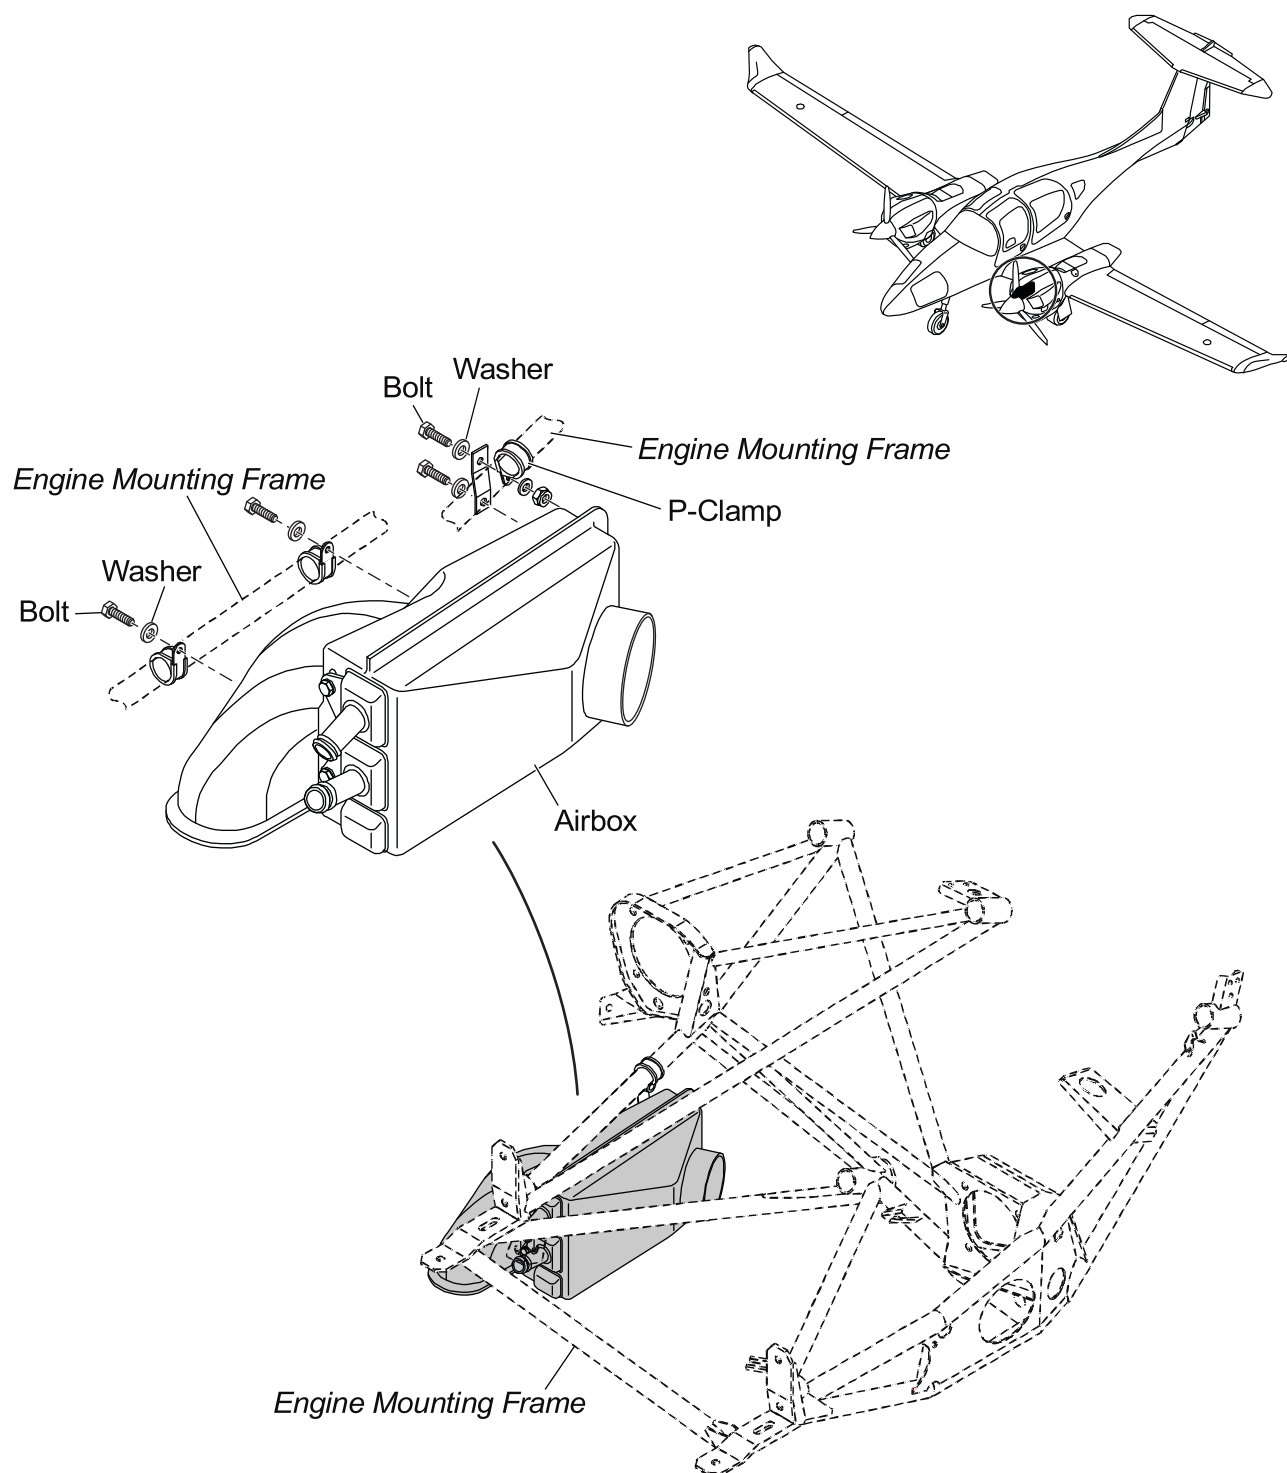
Heat Exchanger Installation - Sheet 1 of 3
